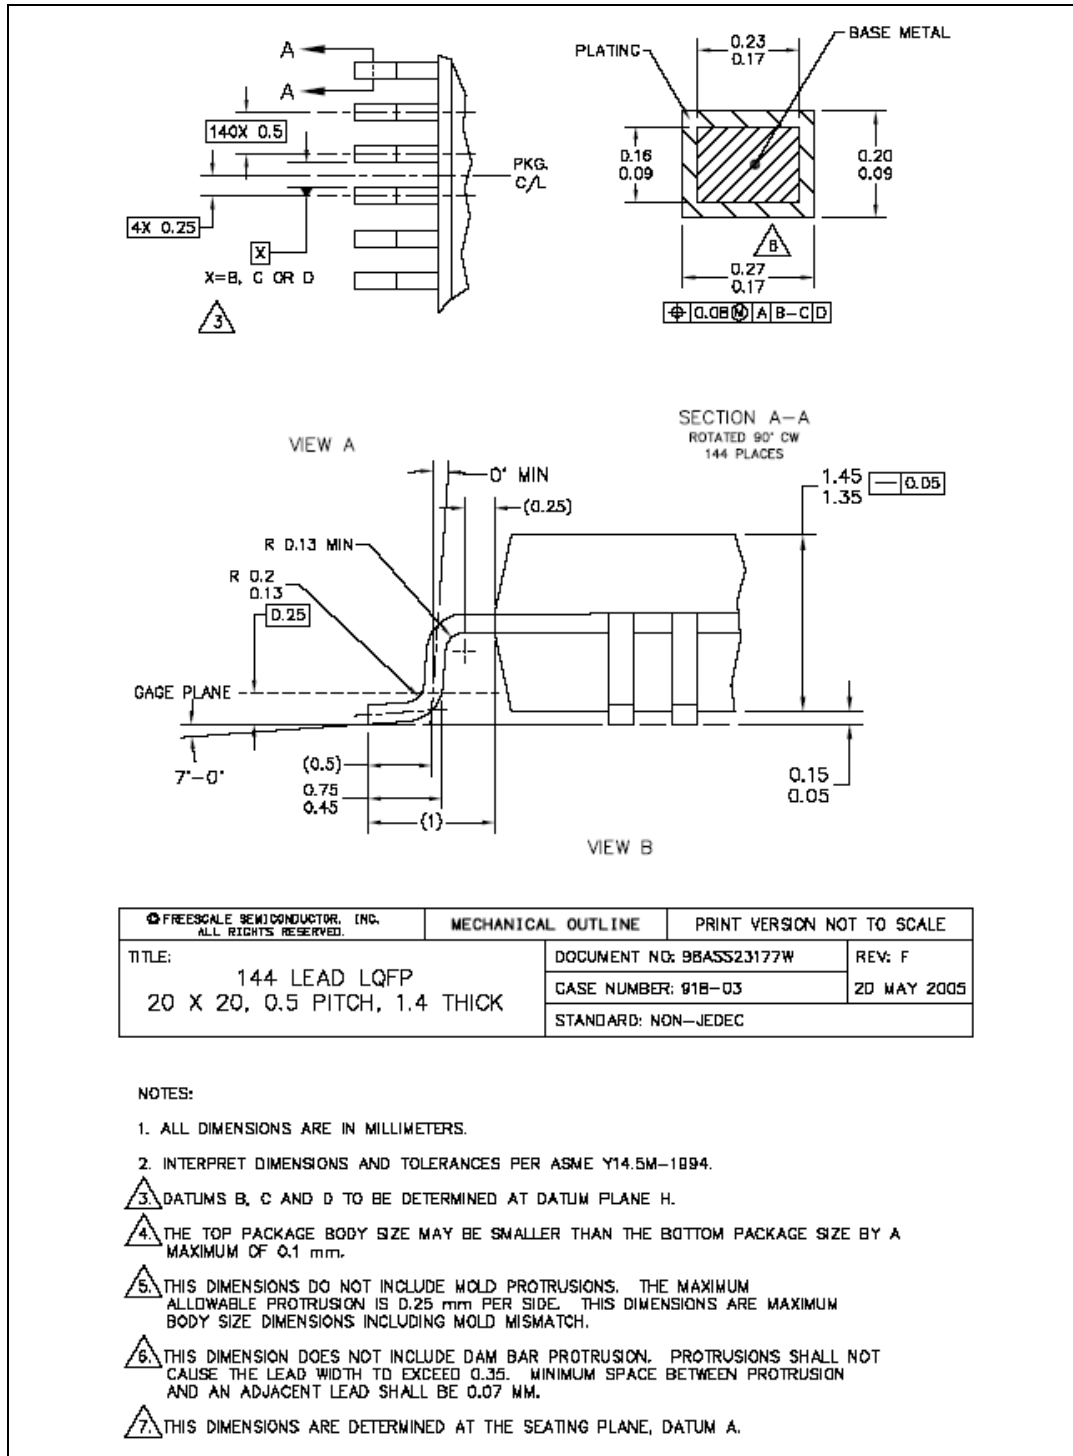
144 LQFP package mechanical drawing (2 of 2)
